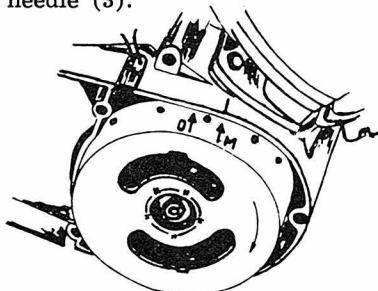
View of the flywheel and crankcase marks used for timing. The "O" mark indicates piston top dead center and "M" mark indicates position BTDC when ignition points should open and spark plug should fire.
